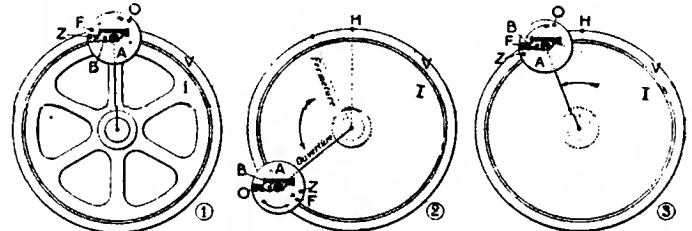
Larrad apparatus mounted between the cone and flywheel. 1, Position of upper dead center; 2, position of opening of exhaust; 3, position of closing of exhaust. A, disc, pierced with holes; B, spirit level; F, closing of exhaust; H, dead center point; I, clutch cone; O, opening of exhaust; V, flywheel; Z, upper dead center point.
